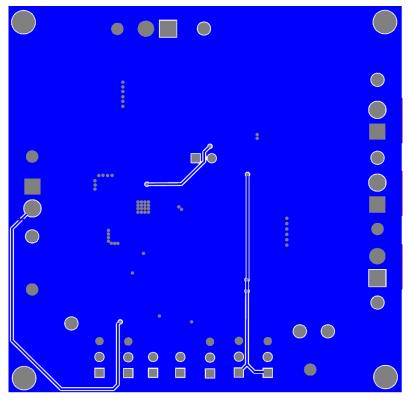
Board Layout (Bottom Layer – Ground Plane)
